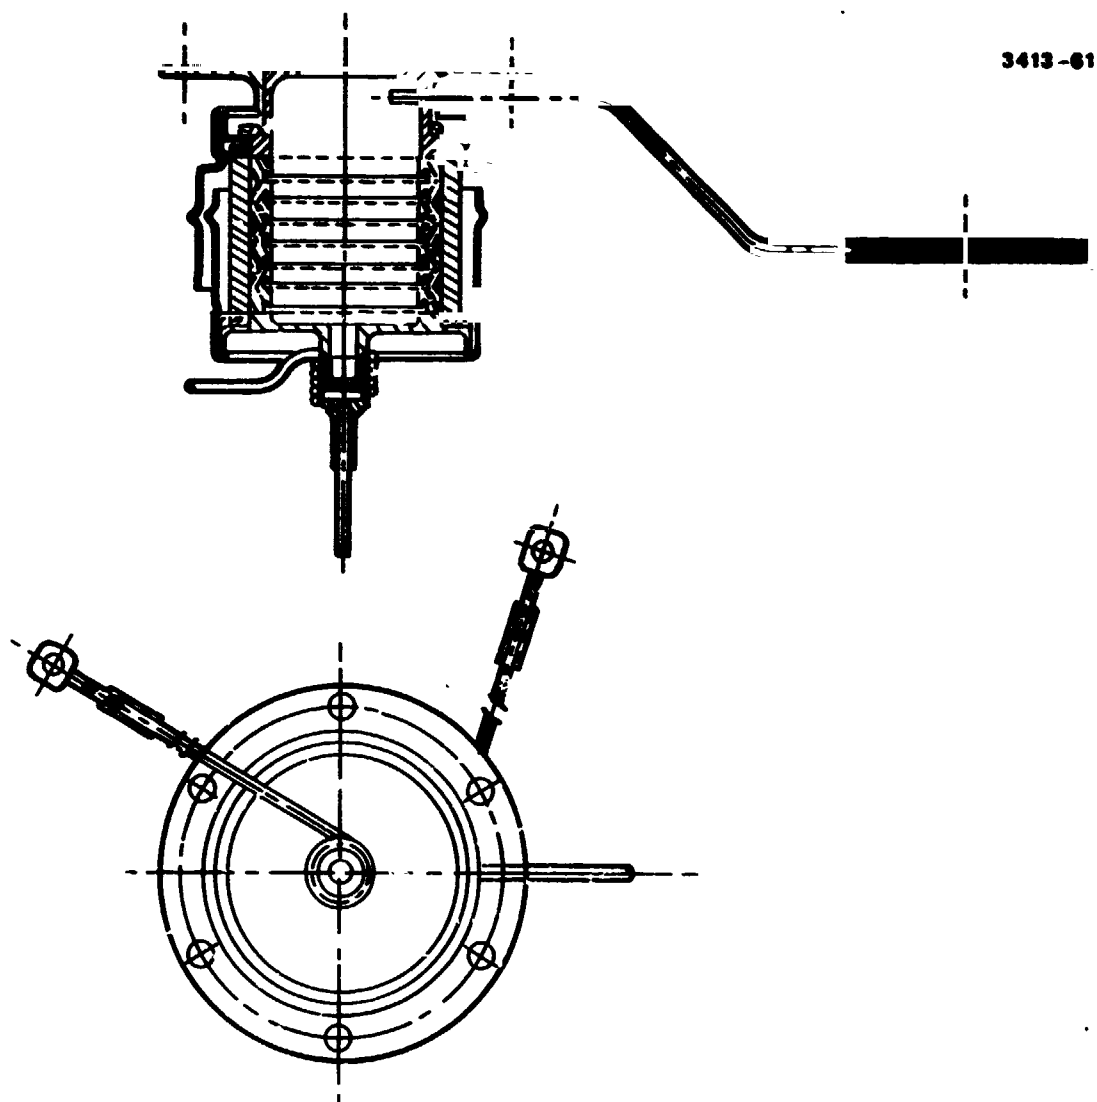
Cathode isolator-vaporizer — assembly P/N D1026622.
